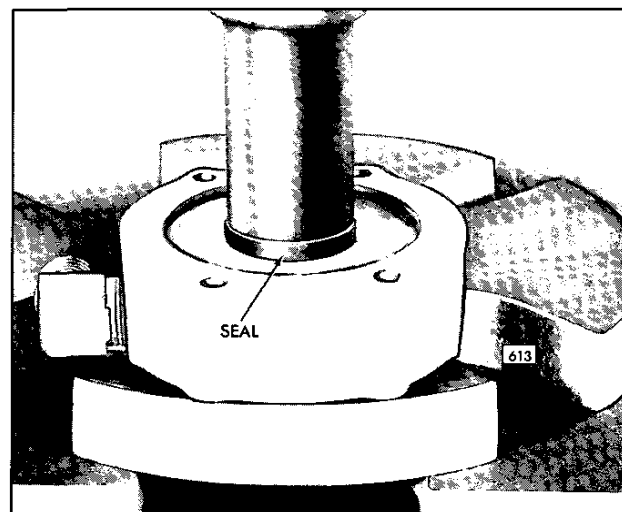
Installing Hydrostarter Shaft Seal in Valve Plate
